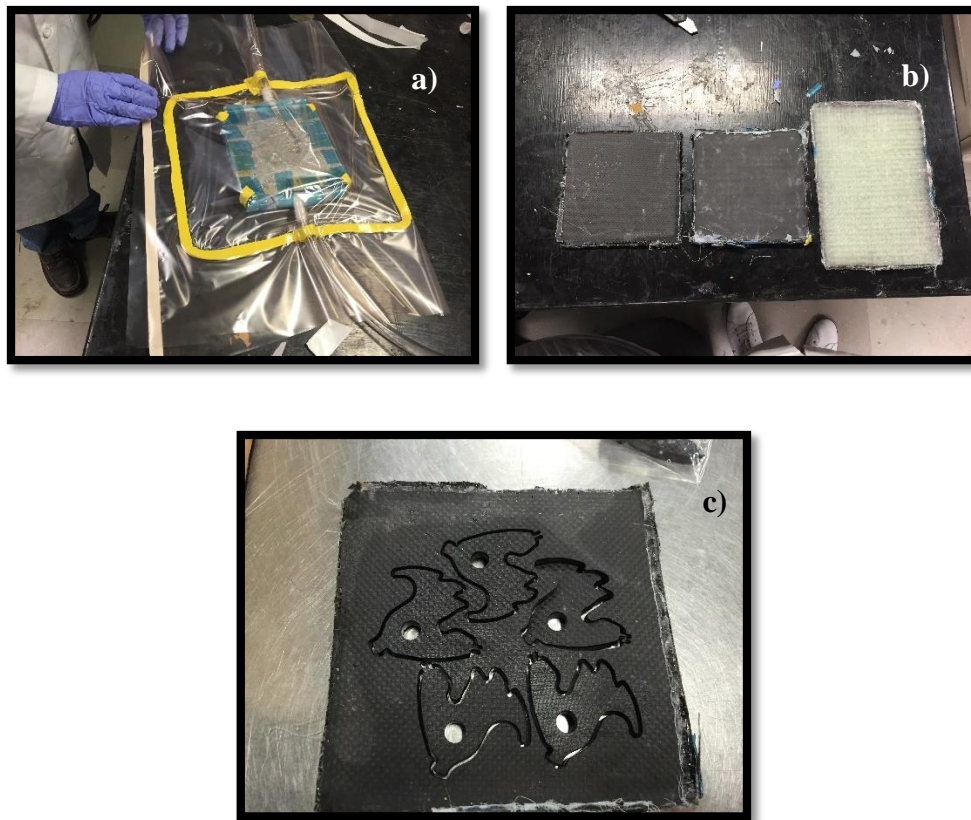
Manufacturing Process: (a) VARTM Mold Inside of Vacuum Bag; (b) Composite Laminates After 24 Hours of Curing; (c) Forkbolts Cut by Water Jet Cutting
